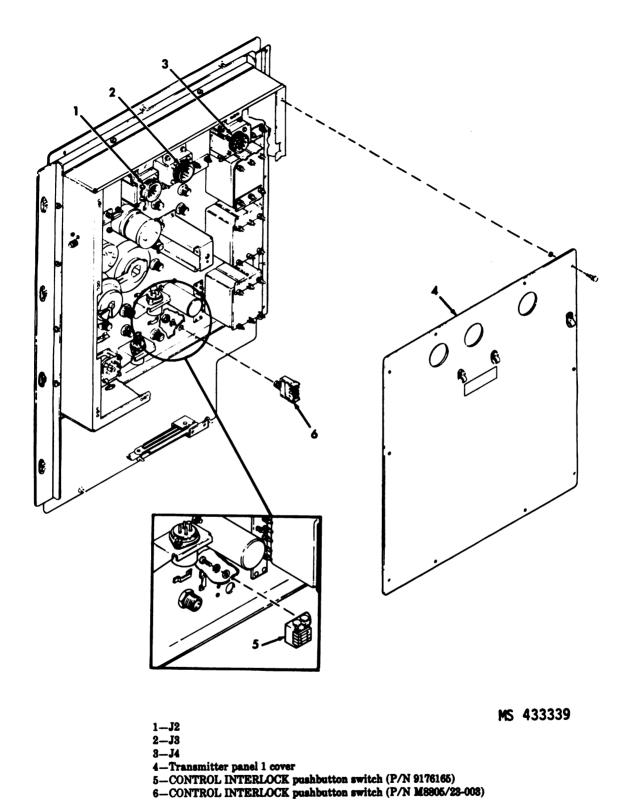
Replacement of the CONTROL INTERLOCK pushbutton switch on transmitter panel 1.
